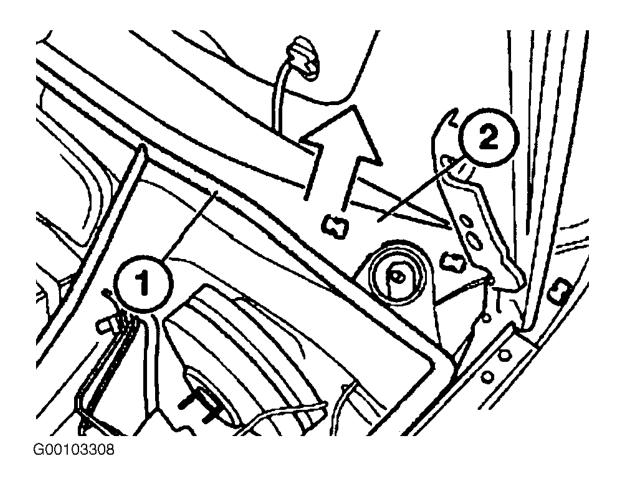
Removing Rubber Seal & Securing Clamps Courtesy of BMW OF NORTH AMERICA, INC.
